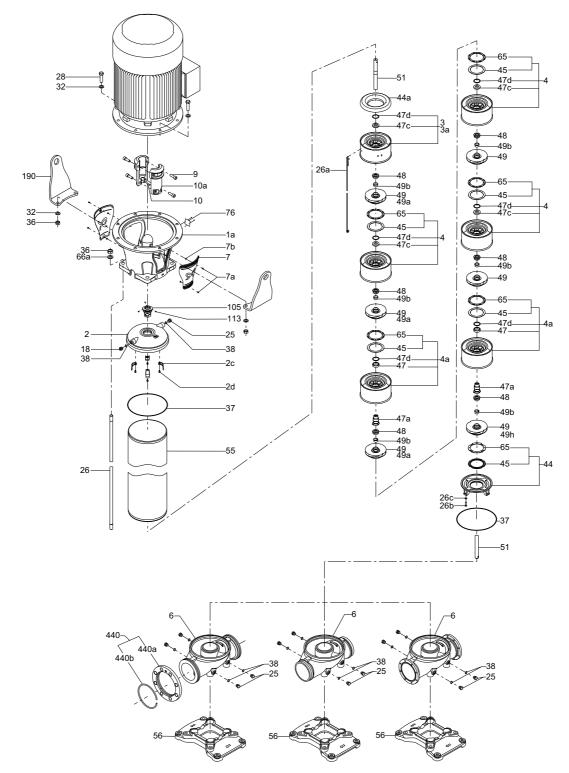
Exploded view of CR, CRN pump with \varnothing 22 shaft and without thrust-handling device
